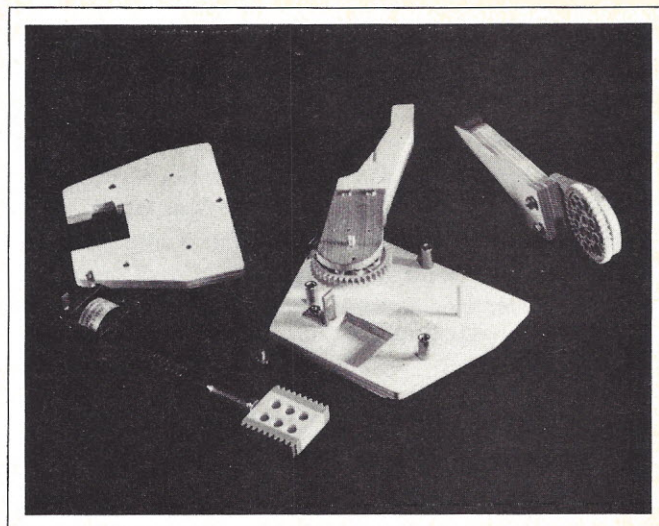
Disassembled hand, showing individual parts and construction details of finger-gear attachment.
